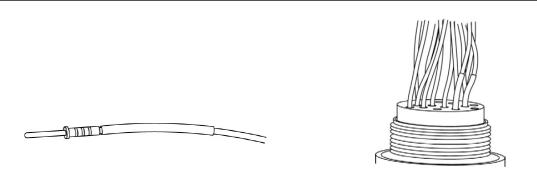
Wire insulation built up with heat shrink installed in connector.
